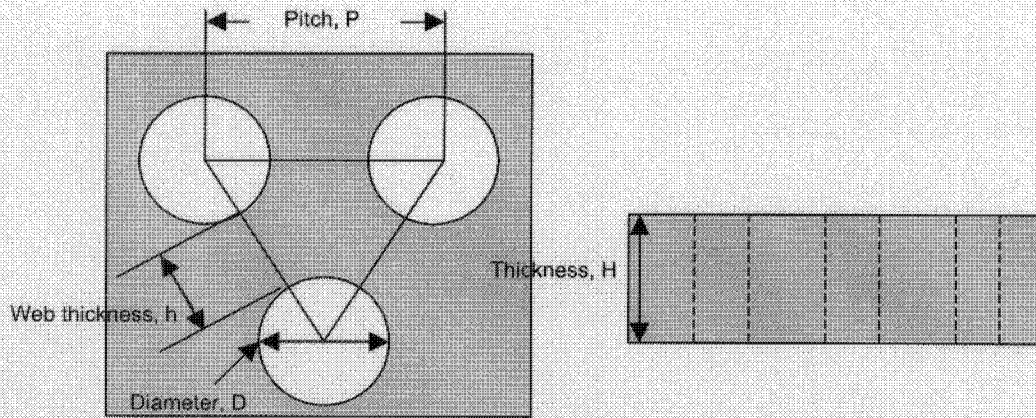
Top and side views of a perforated plate with an equilateral triangular hole pattern.
